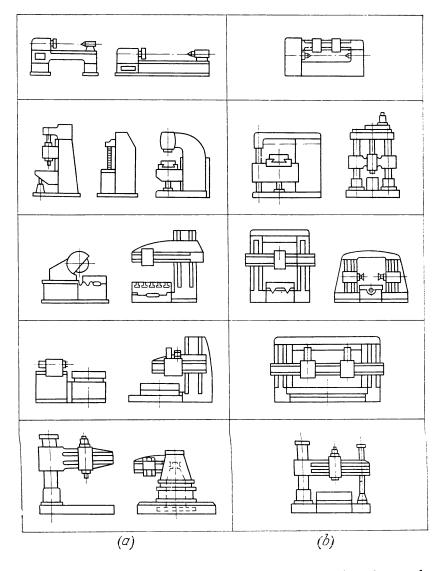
Open (a) and closed (frame) constructions (b) of machine tools
